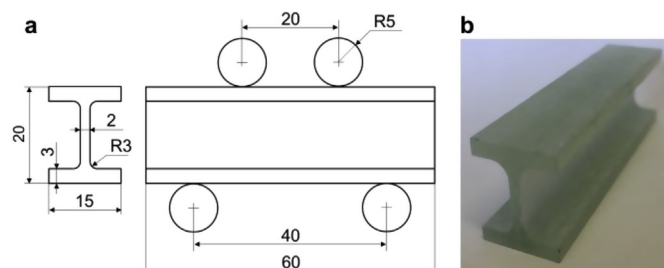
(a) Set up geometry and dimensions of tested I-beam samples and (b) I-beam specimen.
